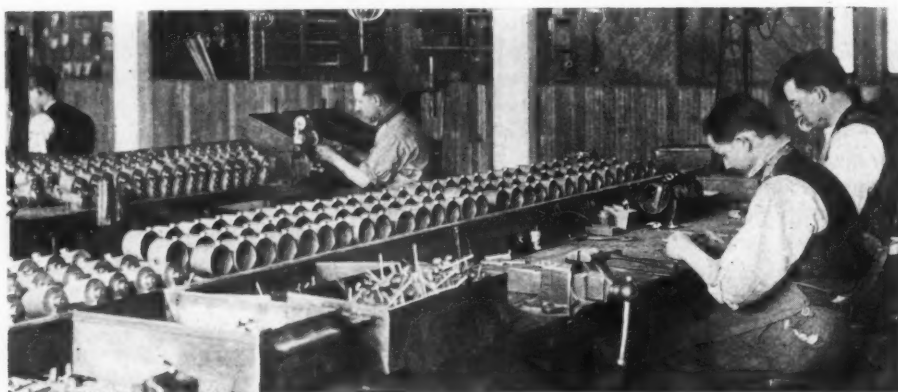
Several hundred Zeniths in the making. A view in the assembly department showing a line-up of partially finished carbureters ready for the fitting of floats and so on. Each assembler has a vise to hold the instrument in the making and the parts ready for fitting are contained in steel trays before him. Thus he is able to give his entire time to the work before him.
